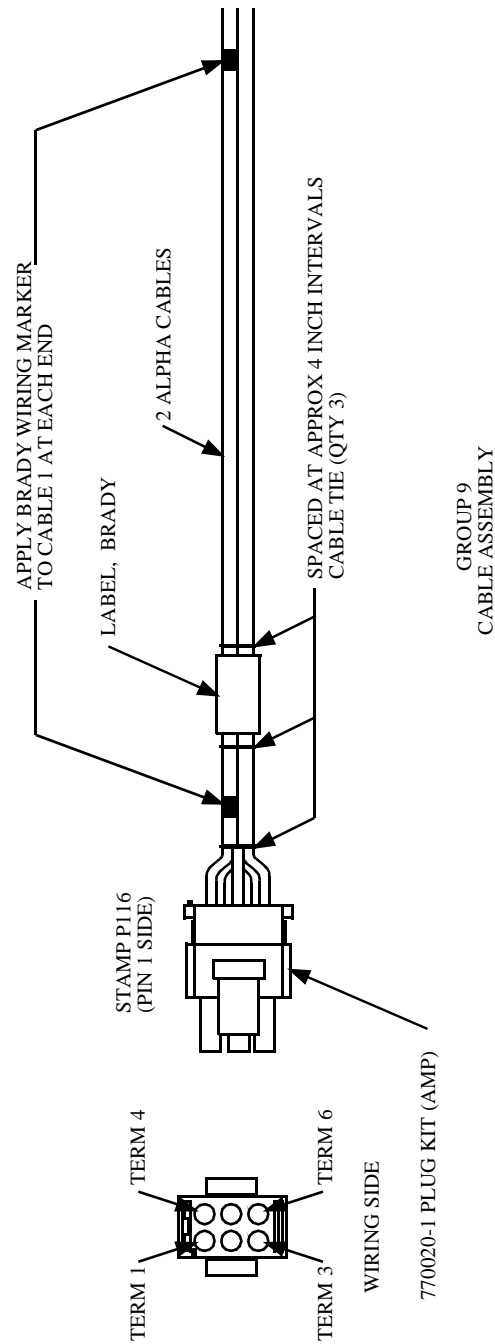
ED-7C818-32, Group 19 Cable Assembly
